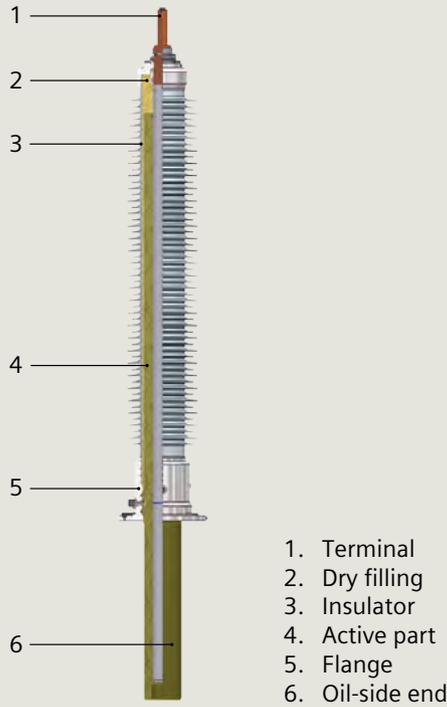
Transformer bushing – resin-impregnated paper (RIP) design – sectional view
